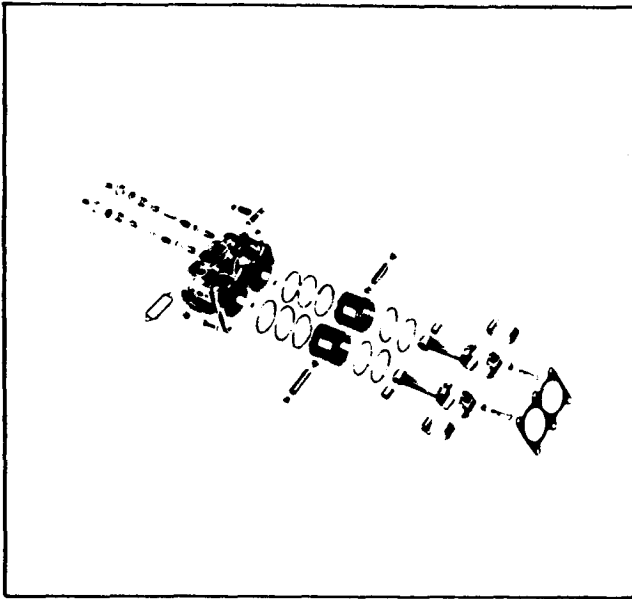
CYLINDER BLOCK - EXPLODED VIEW
